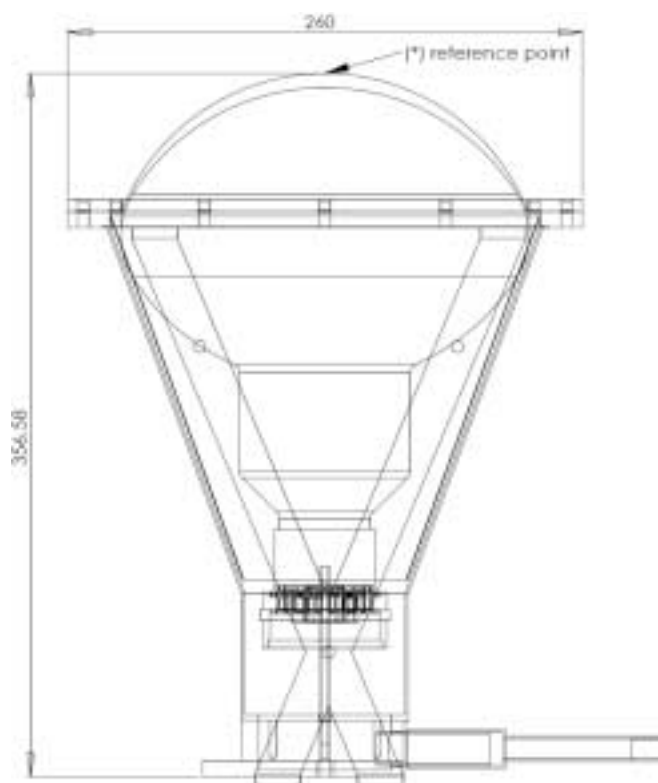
Overall dimensions of the encapsulated PMT with reference point (*).
